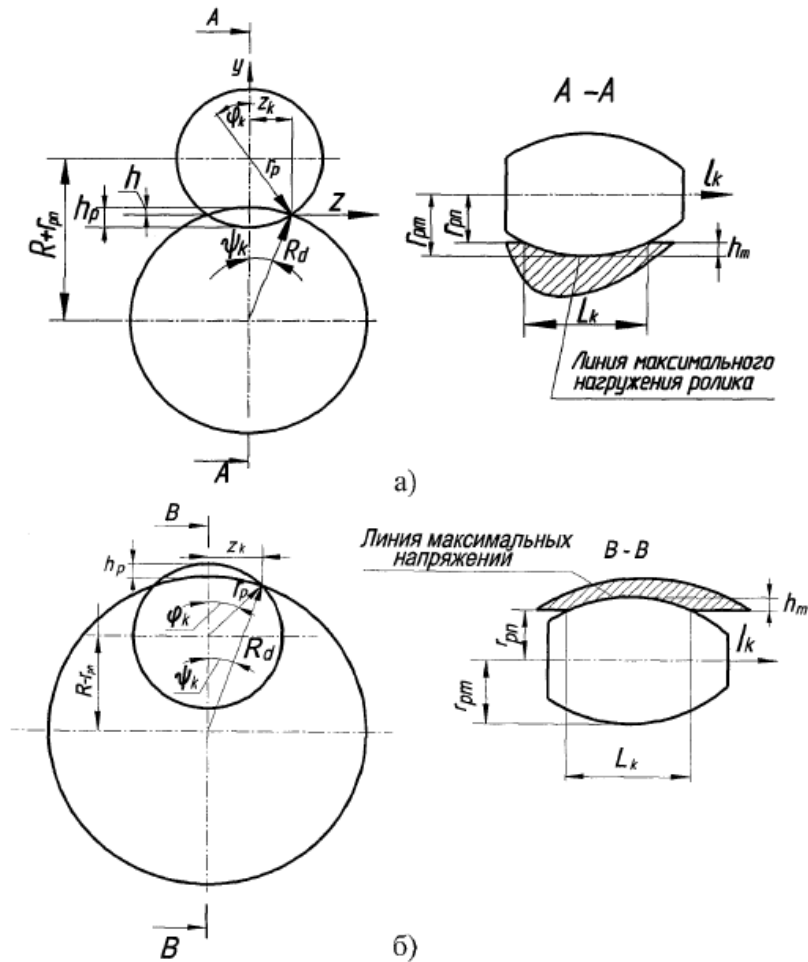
Schemes for changing the radius when processing shafts (a) and holes (b) according to a given shape of the contact zone
